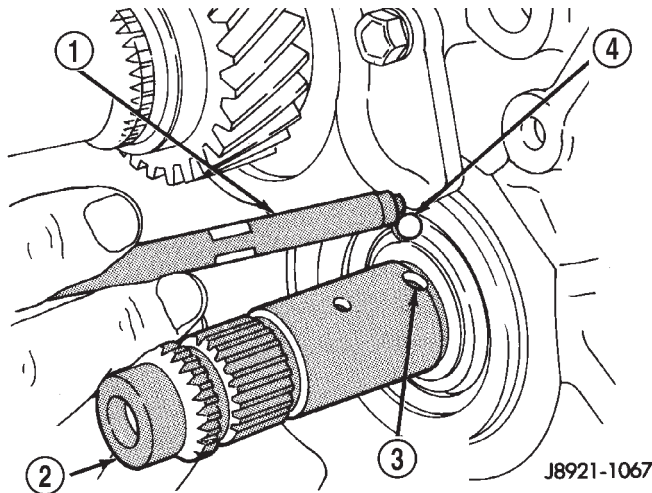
Remove Fifth Gear Thrust Ring Lock Ball
